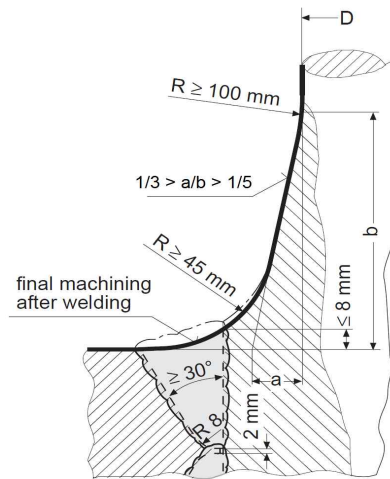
Welded joint between rudder stock and coupling flange
